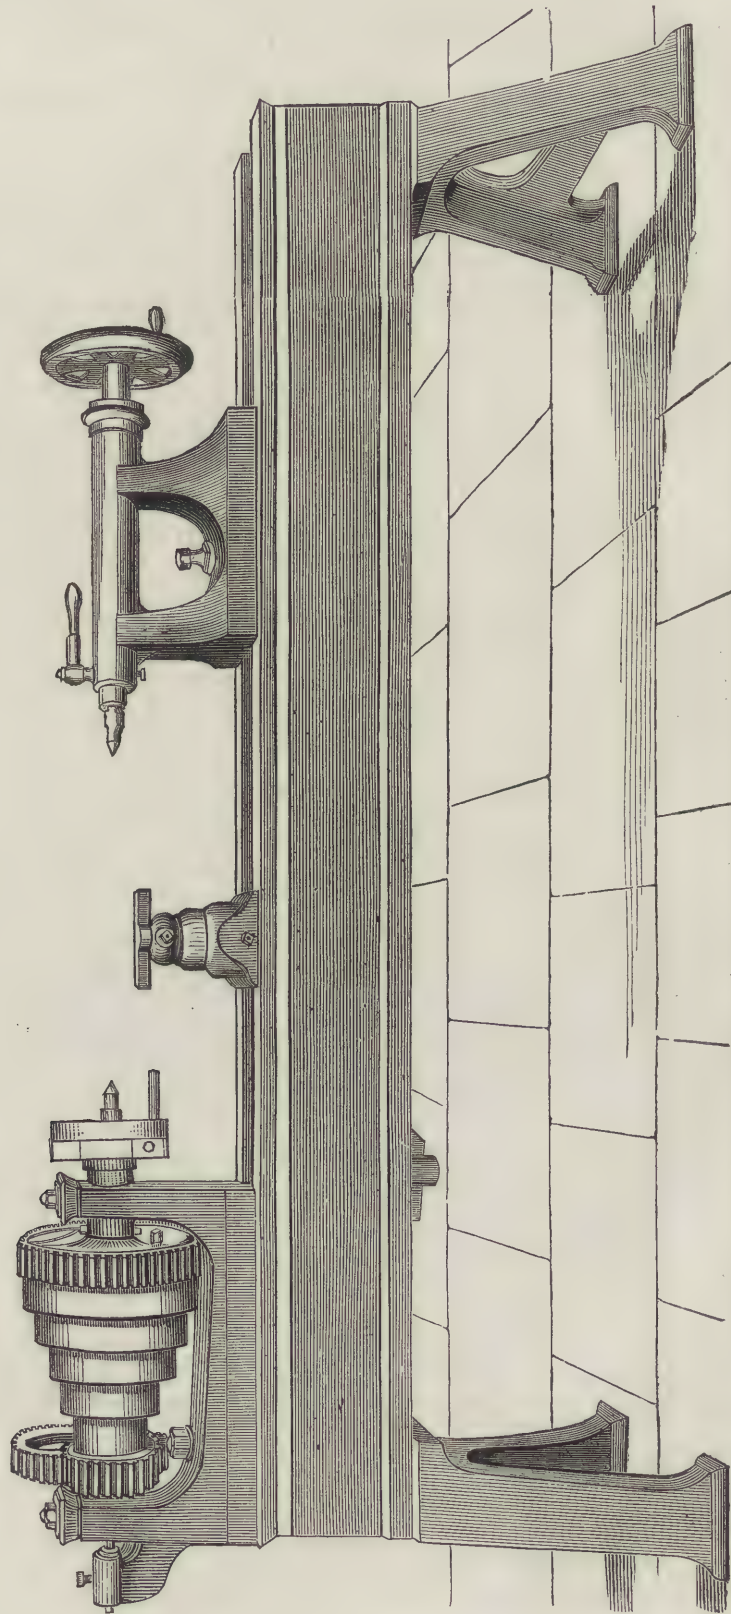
HAND-LATHE, CONSISTING OF TWO HEAD-STOCKS, CATCH-PLATE, FACE-PLATE, REST-SOCKET, AND TOP CONE-PULLEY.
